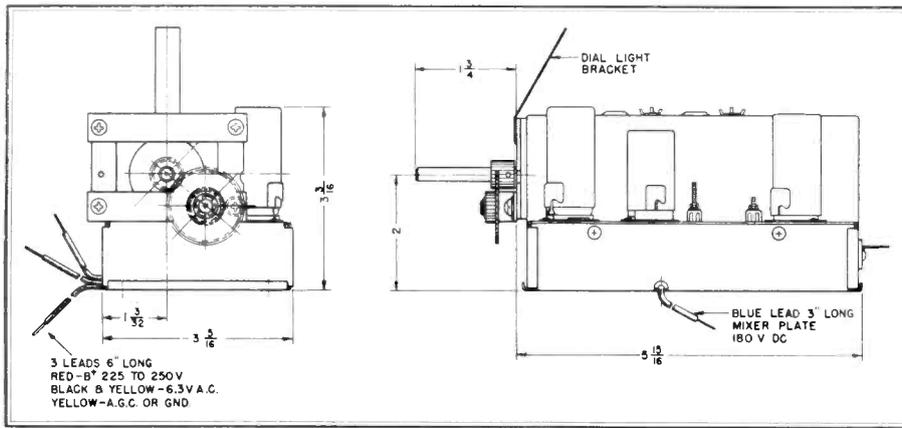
Dimensions of the improved Inputuner, showing power supply requirements
